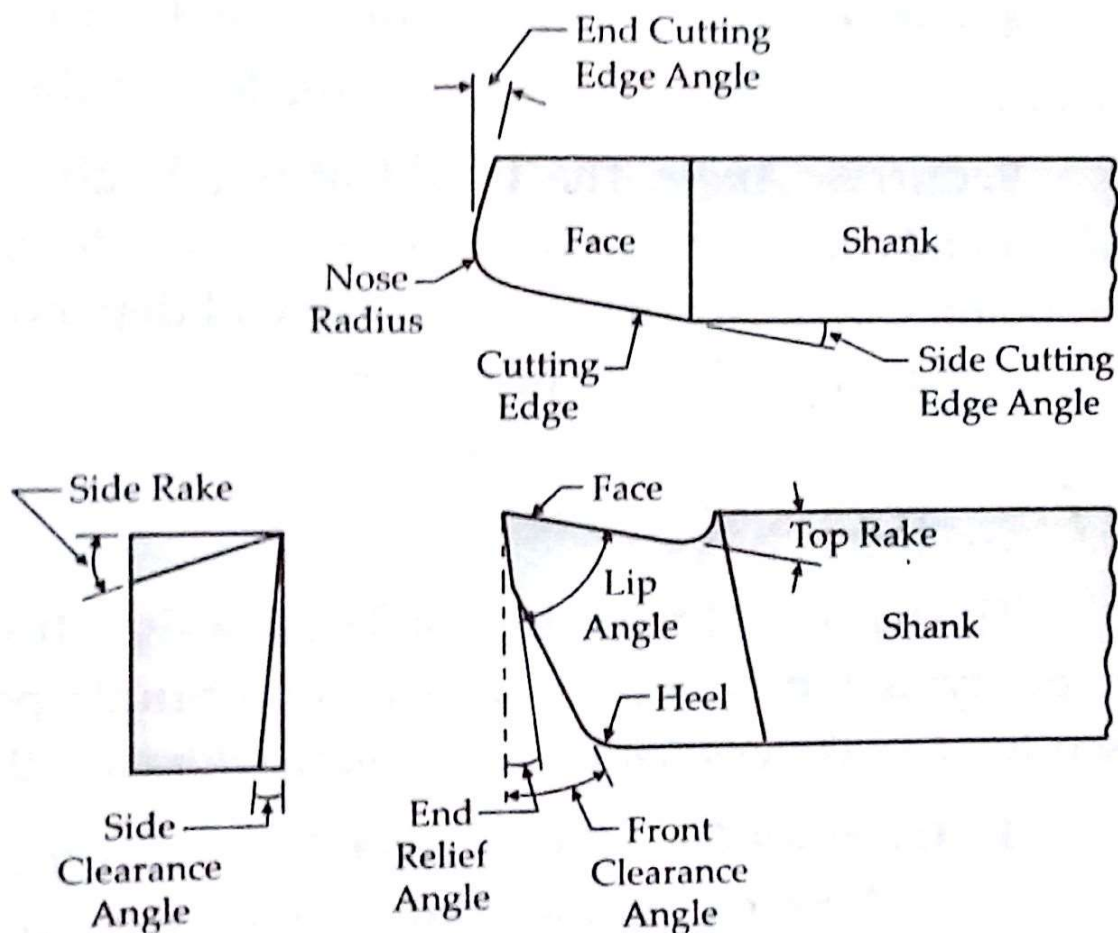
Principal Angles of a Single point Cutting Tool
